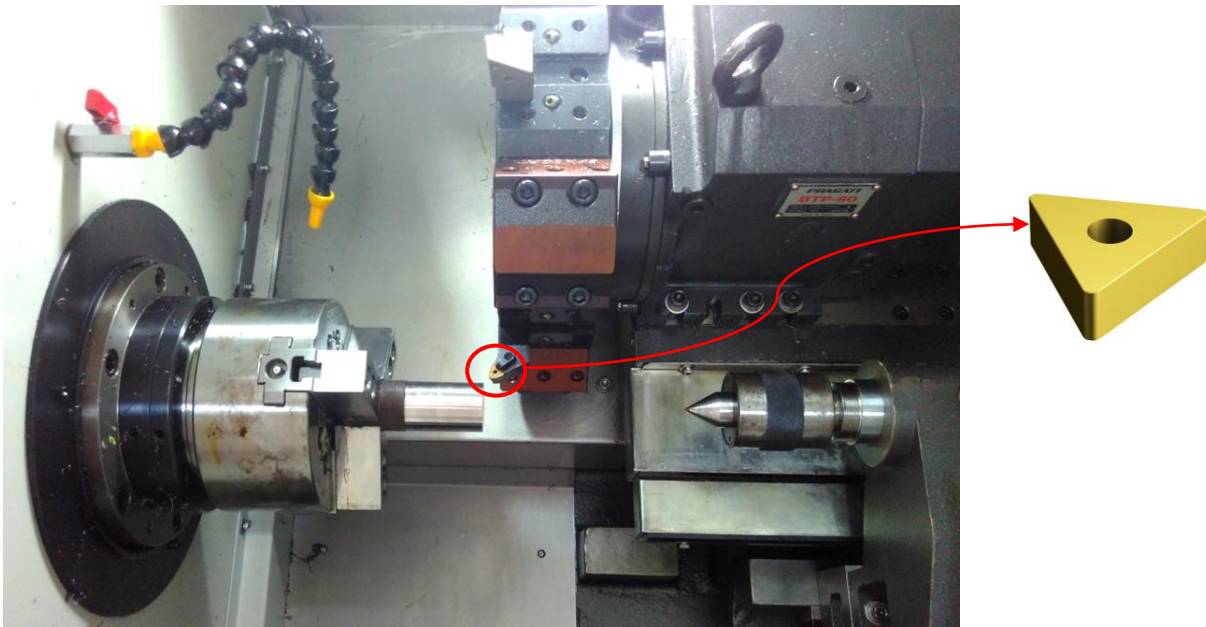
Arrangement of tool and work piece in CNC turning centre with magnified view of mixed ceramic insert
